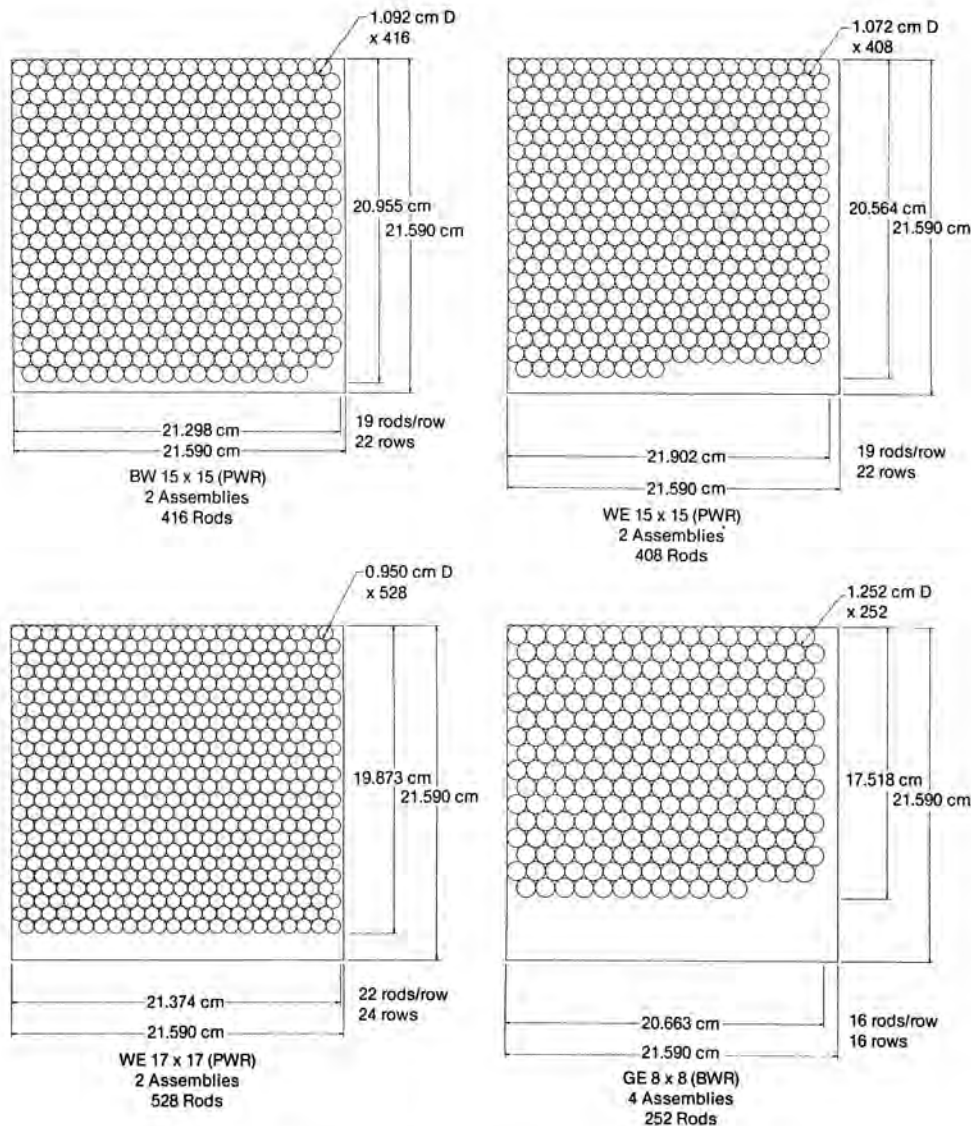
Cross-Sectional View, Fuel Rods and Canisters.
